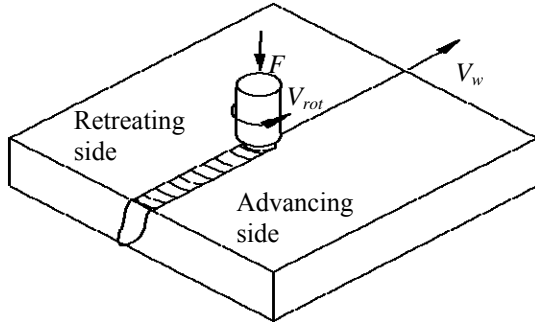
Block diagram of FSW process with counterclockwise direction of the tool
